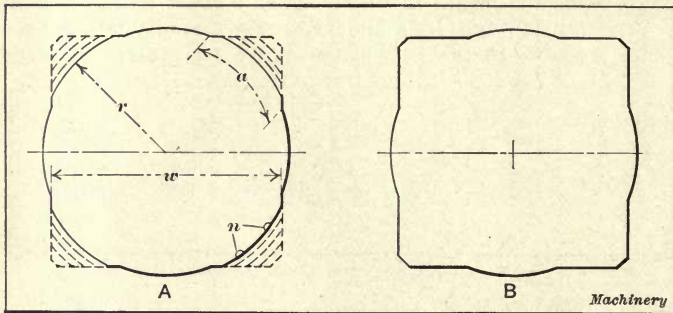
Diagram illustrating Distribution of Tooth Cuts in broaching a Square Hole
